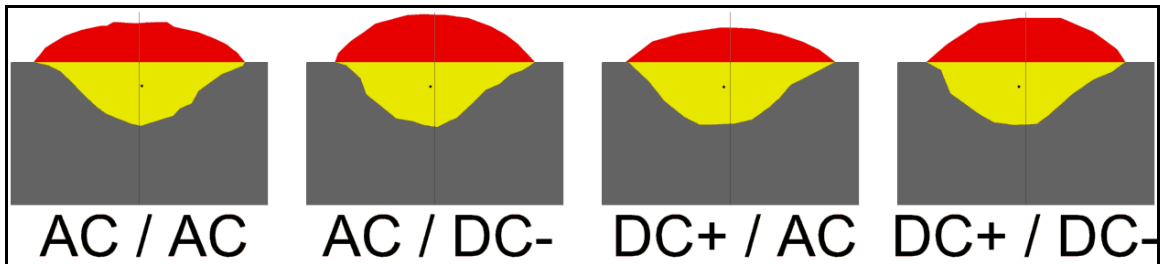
Cross-Section Profiles of Weld Beads Produced Using Minimum Travel Speed
